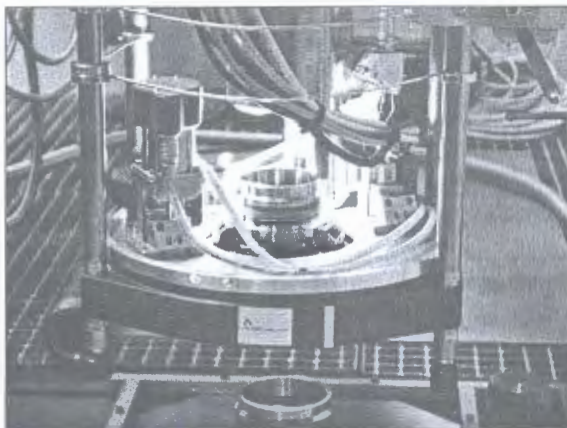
General view of planetary welding head for performance of girth weld in welding of the cap with the cartridge
